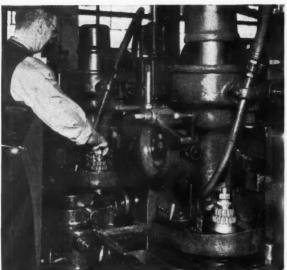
Half a dozen of these Fellows Gear Shapers are used to cut the 18-tooth step on the reverse idler gear. Form-ground Michigan Tool pre-shave shaper cutters are used.
